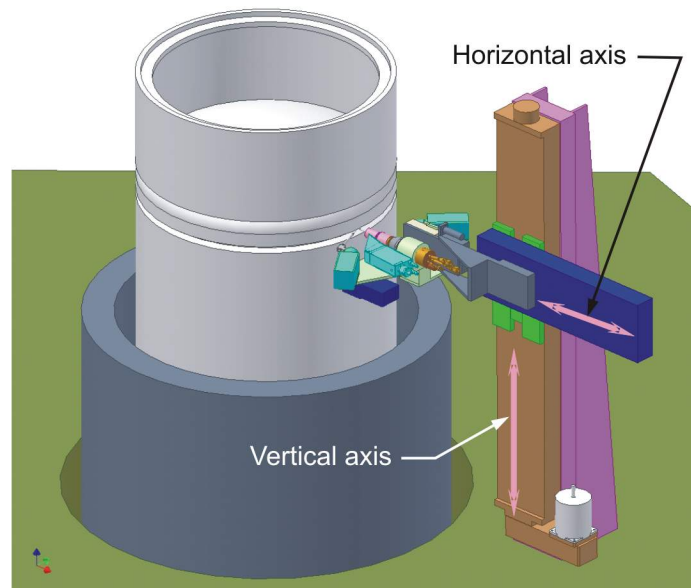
Welding subsystem showing vertical and horizontal motion axes.
